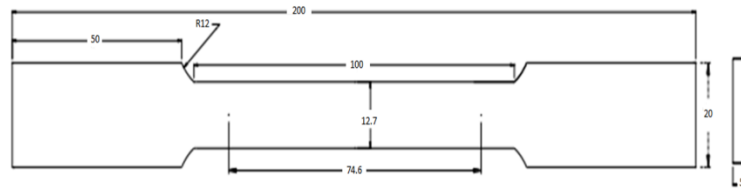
Drawing of tensile test sample manufactured in compliance with ASTM-E8-04
